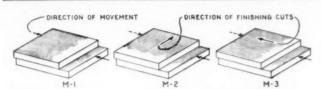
RELATION OF DIRECTION OF MOVEMENT TO DIREC-TIONS OF FINISHING CUTS FOR BEARING PLATES TESTED.
